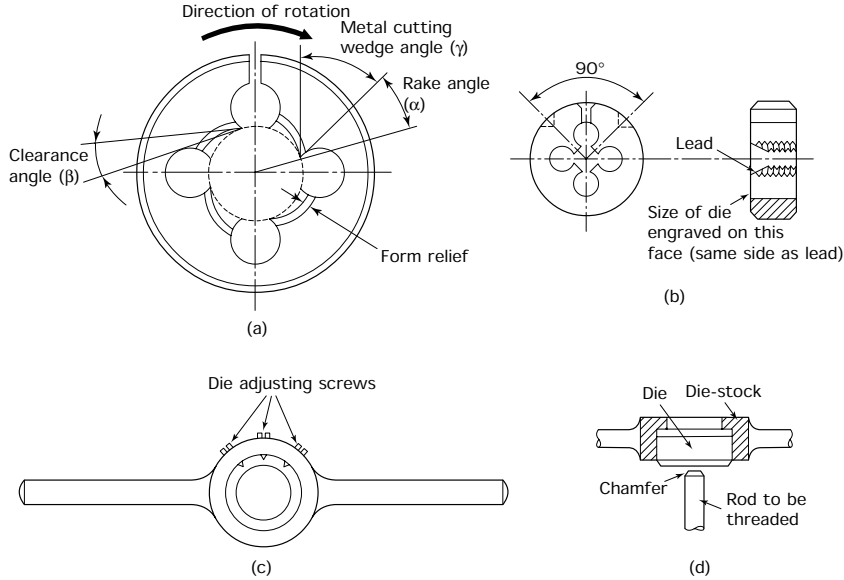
Split button dies: (a) cutting angles applied to a thread-cutting die; (b) split die; (c) diestock; (d) positioning of die in stock – the engraved face of the die is visible, ensuring that the lead of the die is in the correct position
